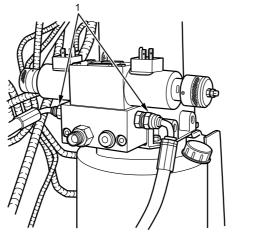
Rear Door/Ramp Hydraulic Pump Mounting Bolts.
